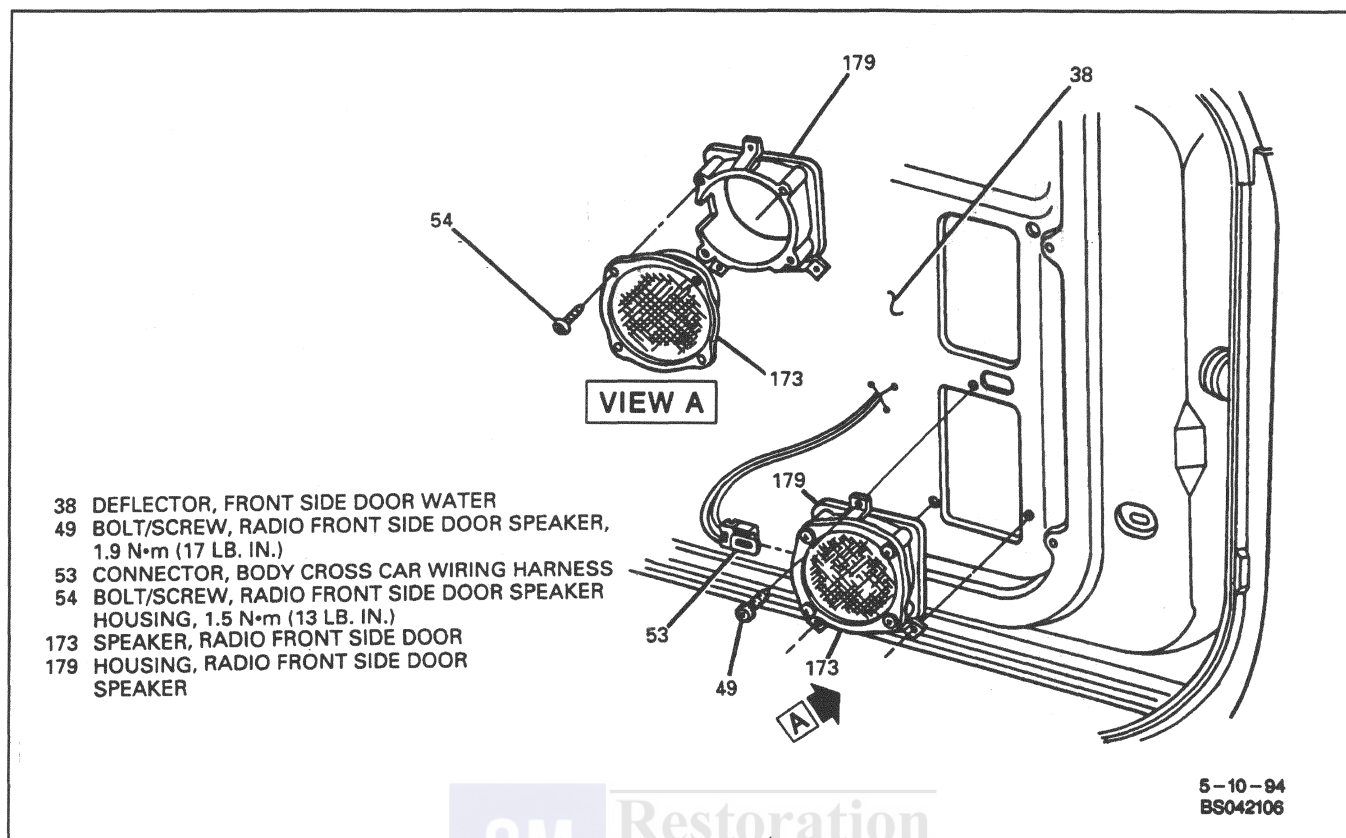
Removing Radio Front Side Door Speaker-(Buick)
